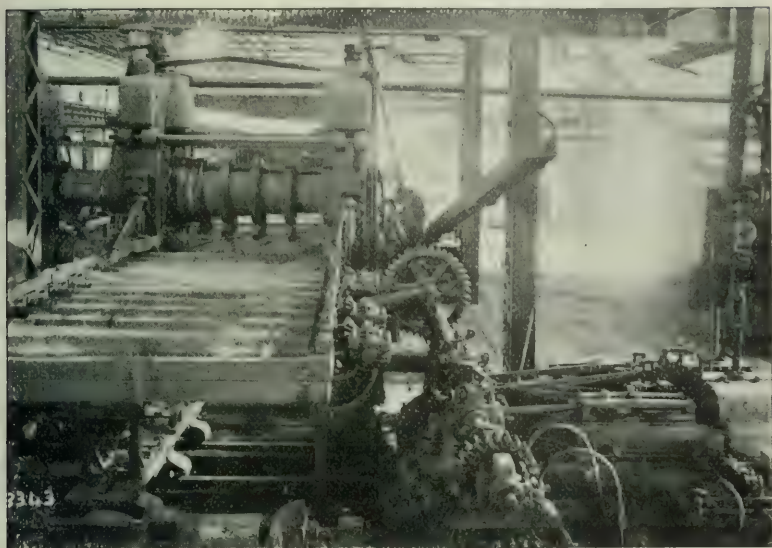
Rail Mill. Blooming Rolls and Tables.
